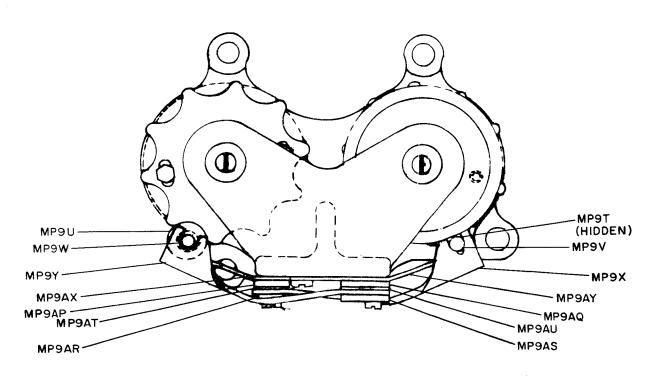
Dual-Sprocket Assembly A2MP9, Component Locations
